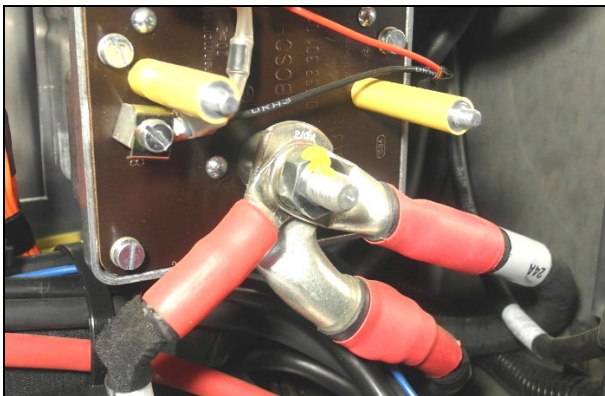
When several terminals are connected on a single stud terminal, the largest cable lug must be placed first, followed by the second larger and so on. Cable lugs should be distributed around the stud terminal in a way that no cable lug is distorted when tightening the nut.
